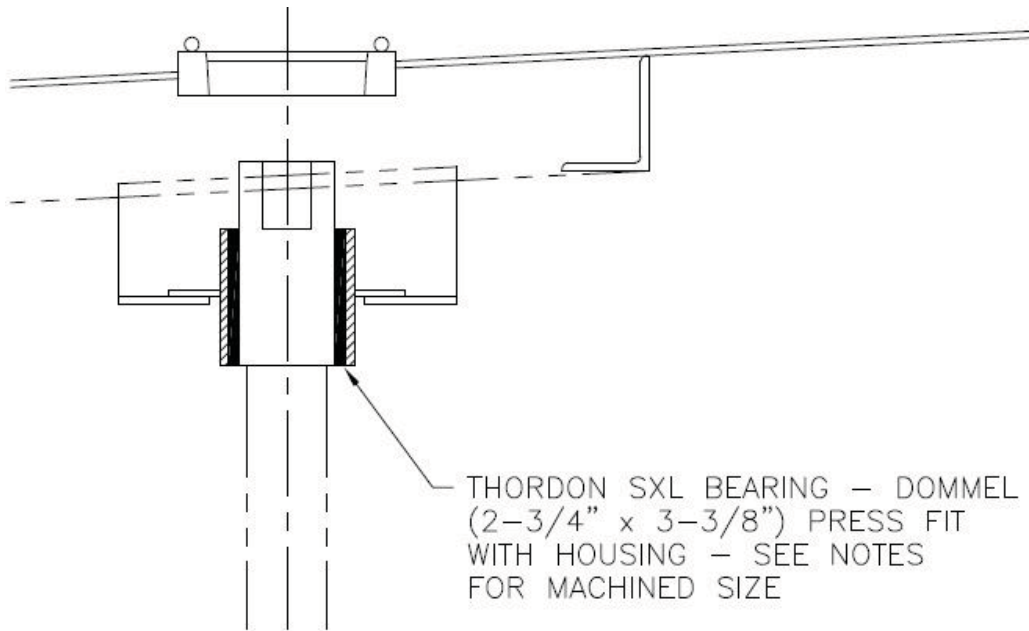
Fig. 5 Rudder Drawing – Upper Bearing
